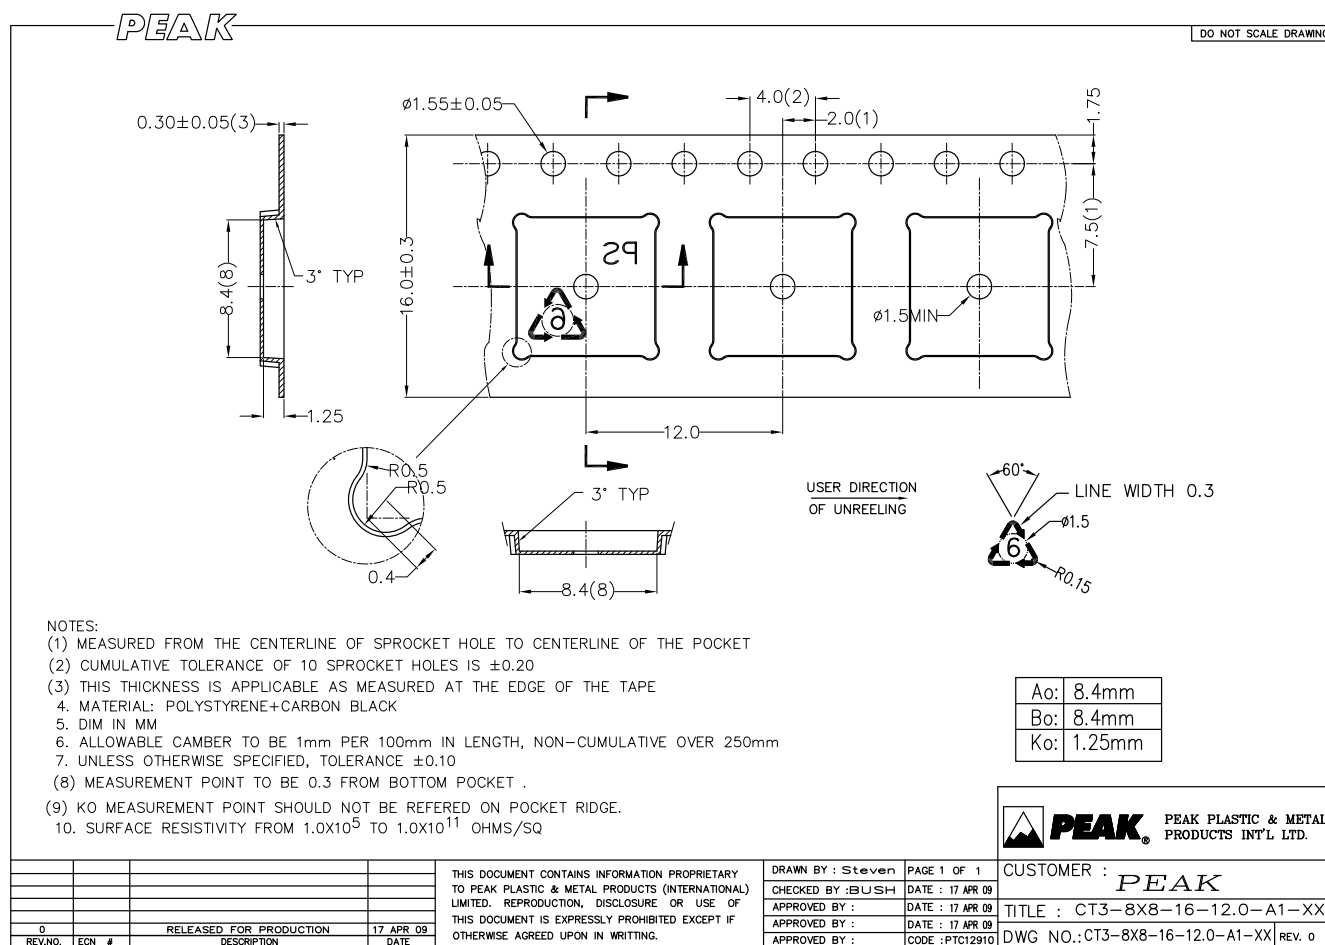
Example 60-Pin LGA Tape and Reel Detailed Mechanical
